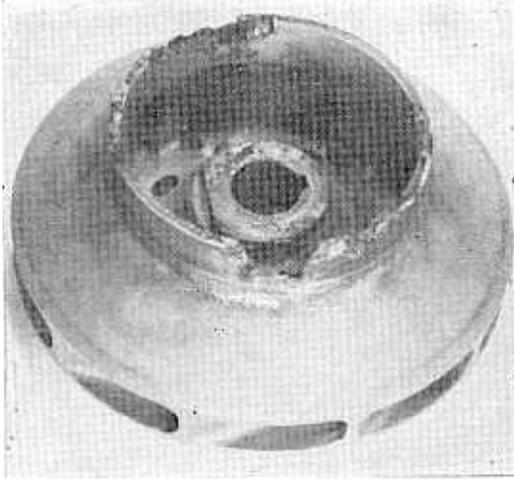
Aluminium impeller failed in service due to galvanic attack.
